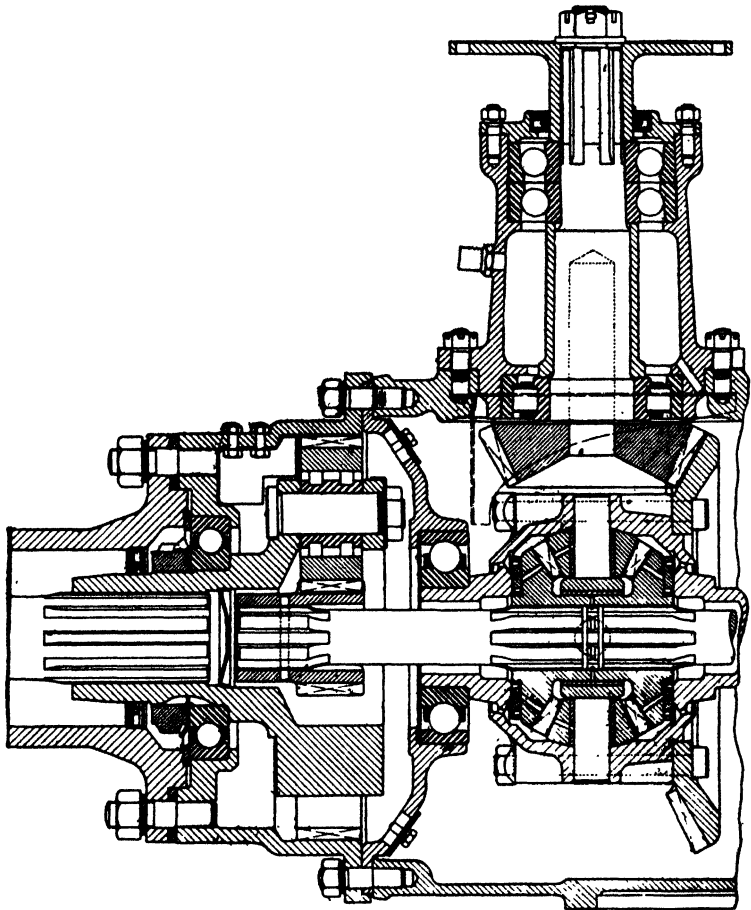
DOUBLE-REDUCTION GEAR WITH SECOND REDUCTION BY PLANETARY GEARS.
